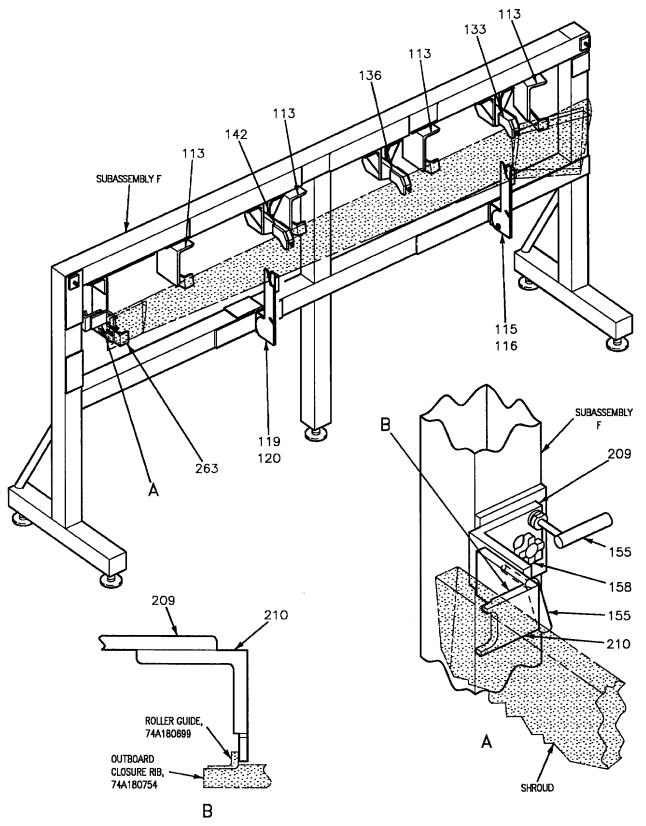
Roller Guide, 74A180699 (Sheet 1)
